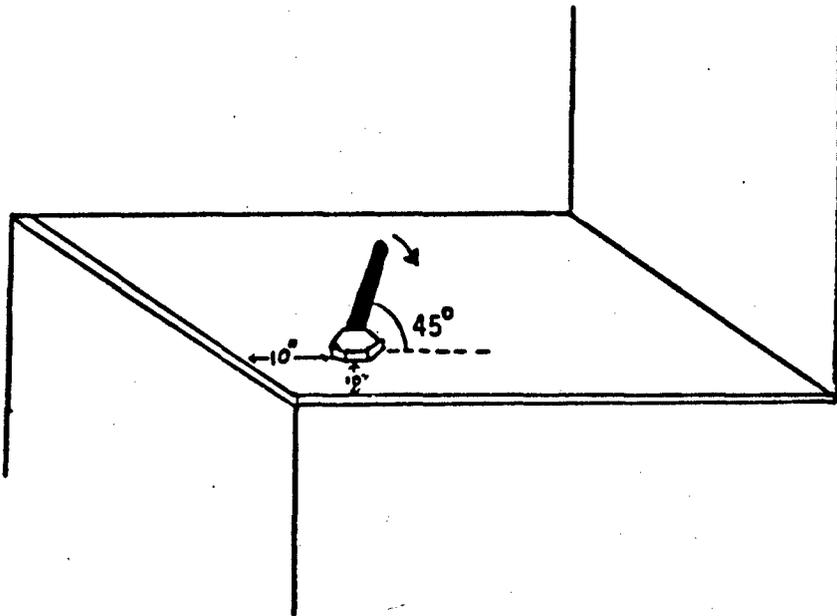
Diagram of where 1" bolt should be welded onto the shelve(s).
